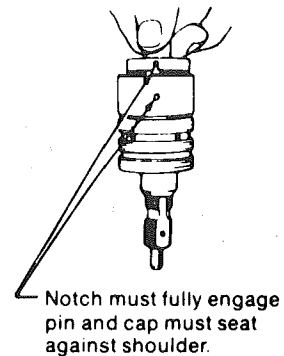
B7-15 Overhaul 800/808 Gear, Chart D
